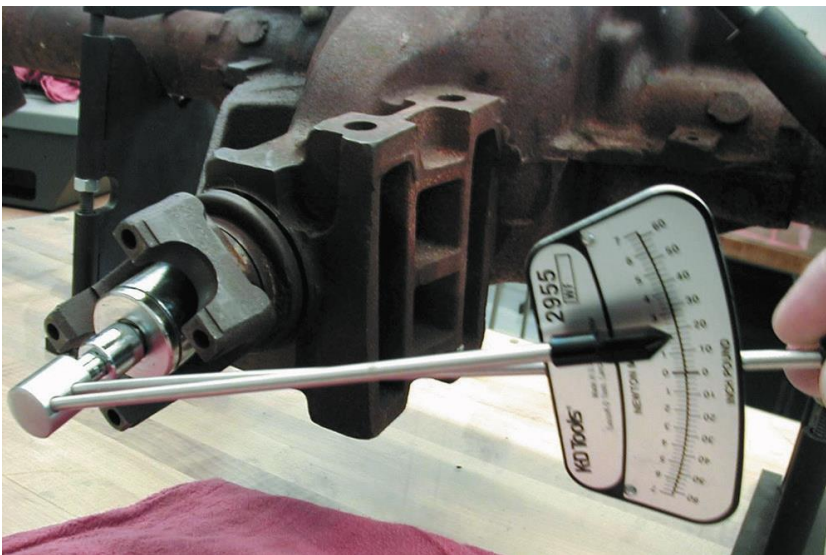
The rotating torque is checked after each small tightening of the pinion nut.
